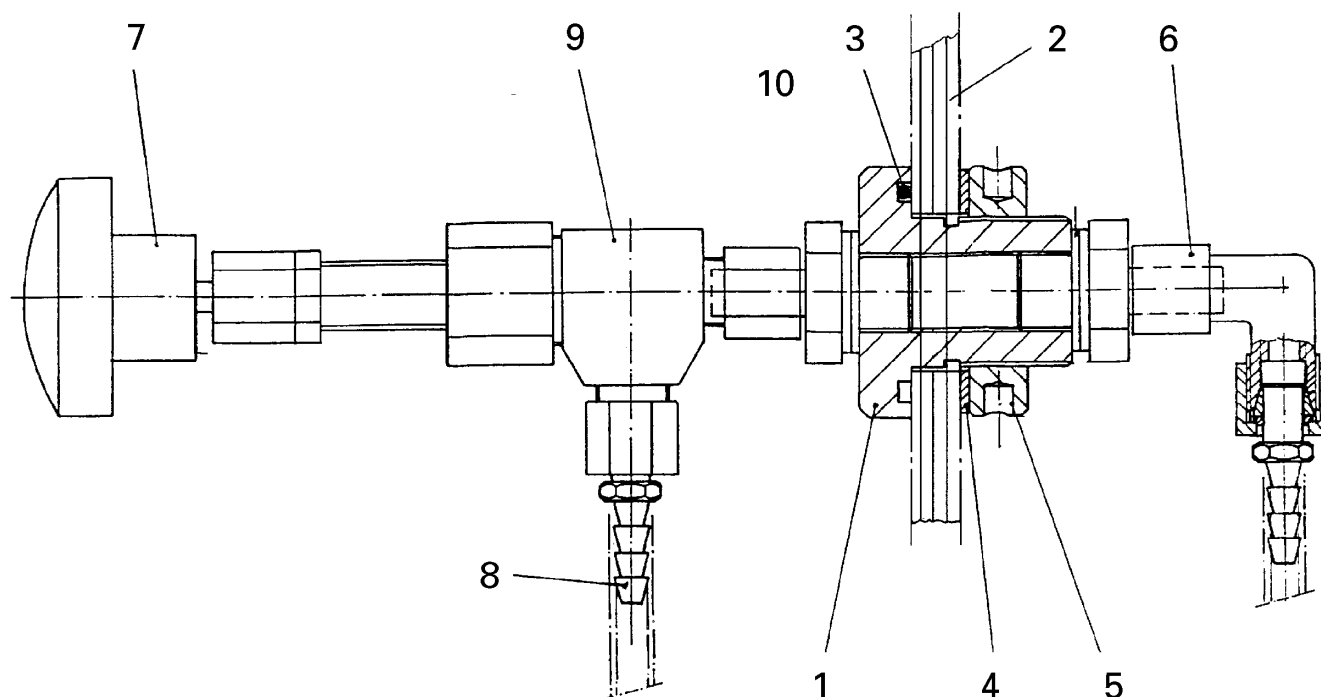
Valve (with internal and external openings) for containment enclosure wall — Model A
